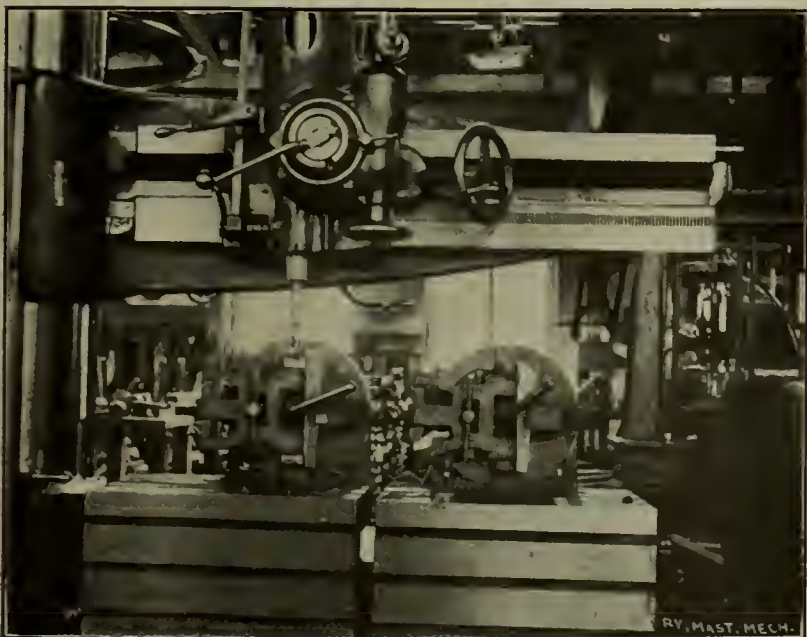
Radial Drill Boring Contact Shoes—on Two Jigs.
